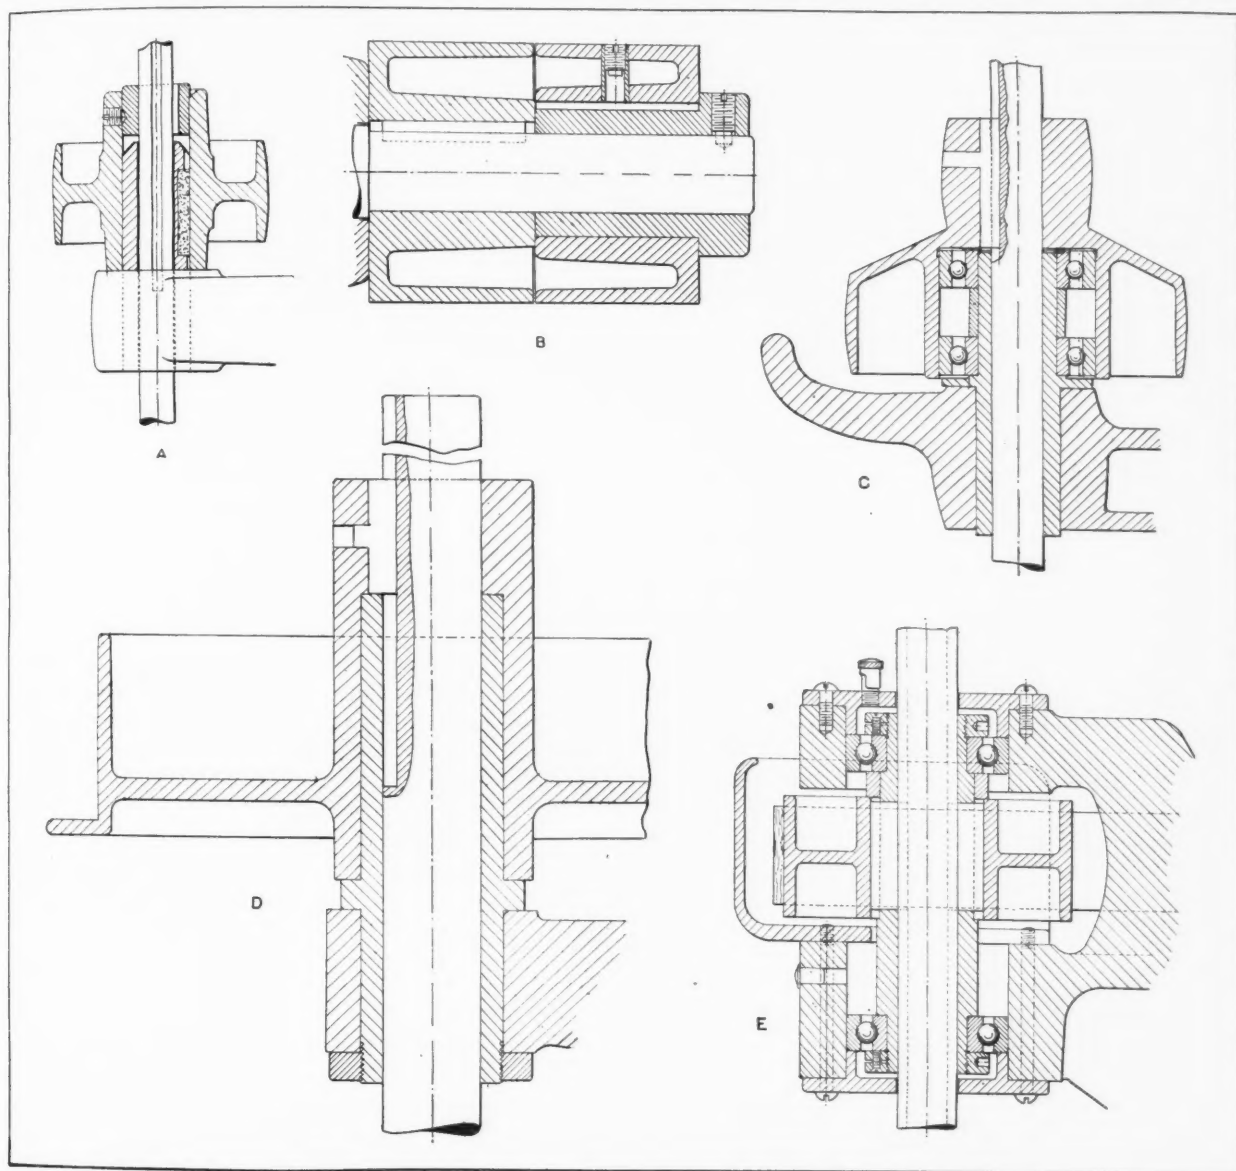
Plain and Ball-bearing Pulleys for Vertical Shafts, and Horizontal-shaft Pulley Designed to Prevent Wear
